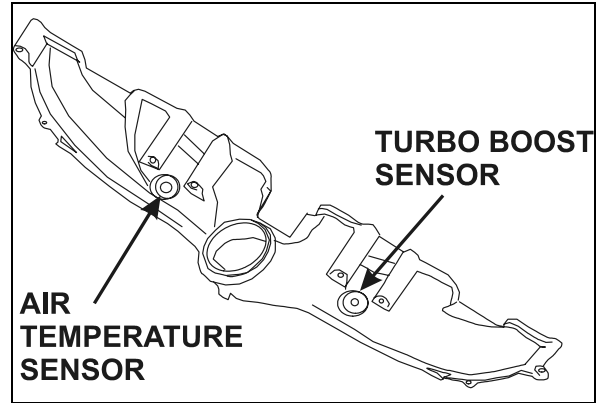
TURBO BOOST PRESSURE SENSOR 01023
